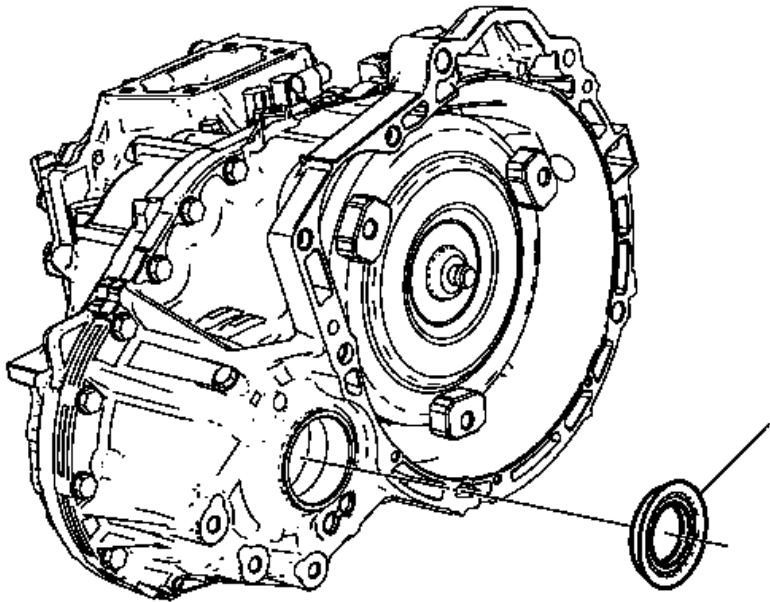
Front Wheel Drive Shaft Seal - Right Side
